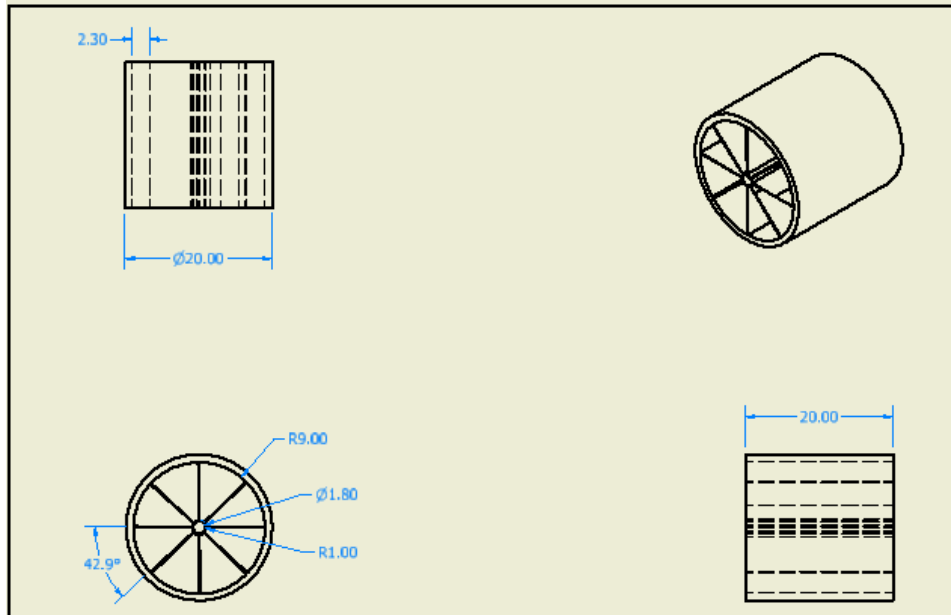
Engineering Drawing of the pill compartment that is divided into 8 sections, 7 for different medications and one for an opening to dispense. All the dimensions highlighted were crucial to the overall design and assembly.
